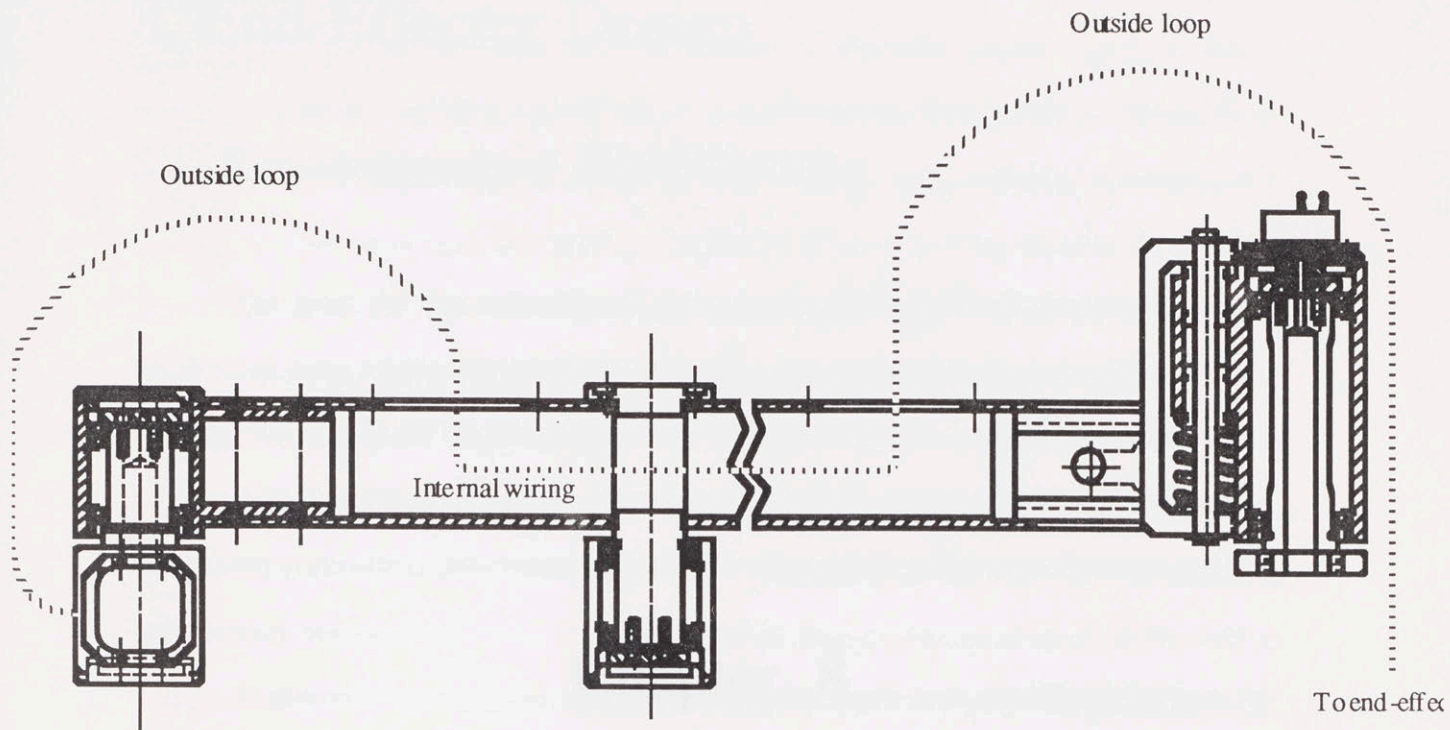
Internal Electrical Wiring and Outside Loops
